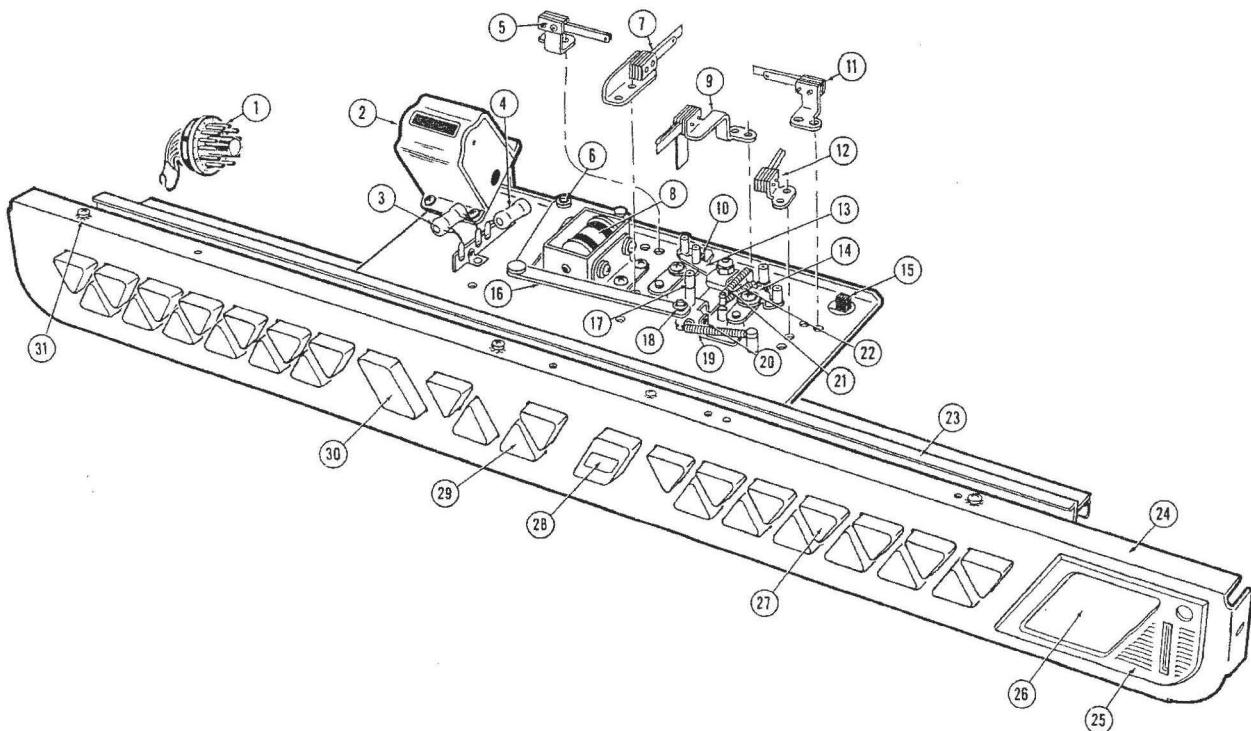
SELECTOR SWITCH ASSEMBLY, 2404-2404S
